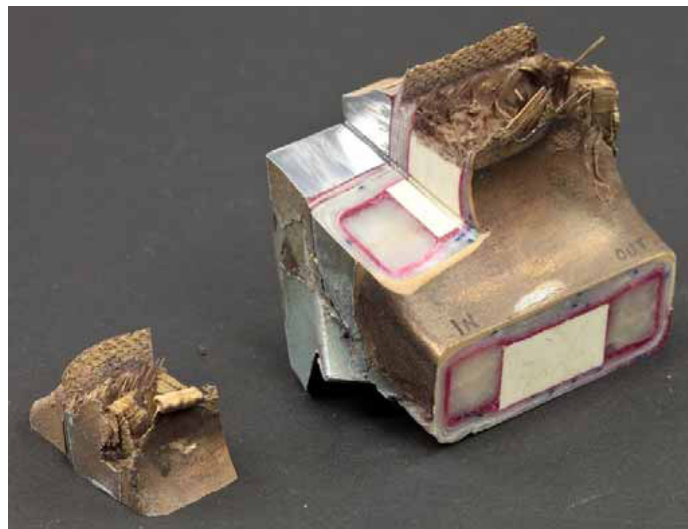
Section cut from inboard trailing edge of the White blade for detailed fractographic examination
